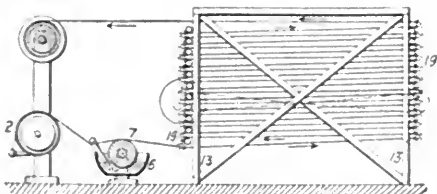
The Lübbertsmeier Continuous Lacquering Machine.
